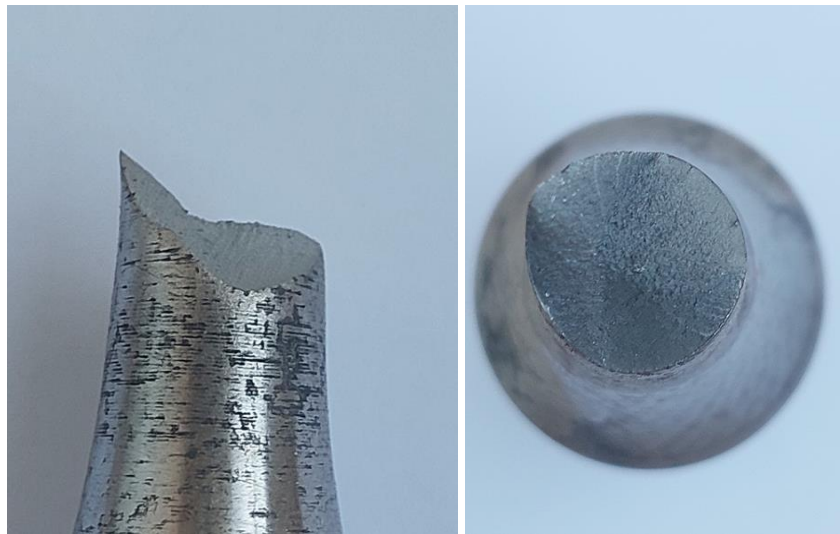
Side and Top Views of Fracture Surface at Fatigue Test 1
